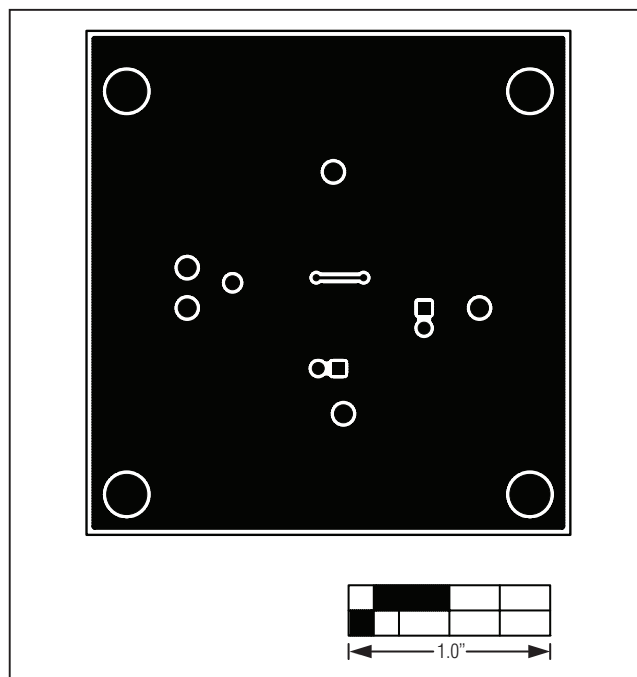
MAX9943 EV Kit PCB Layout—Solder Side
